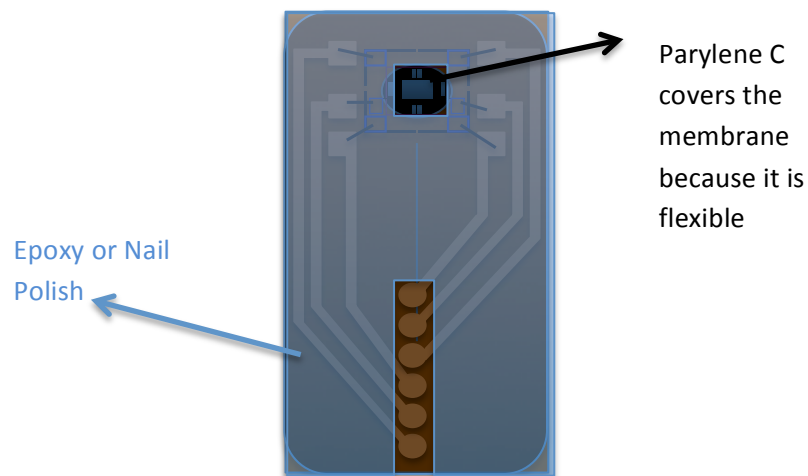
Protective Layer Version 2 - Top View of PCB + Die + Parylene Coating + Epoxy
